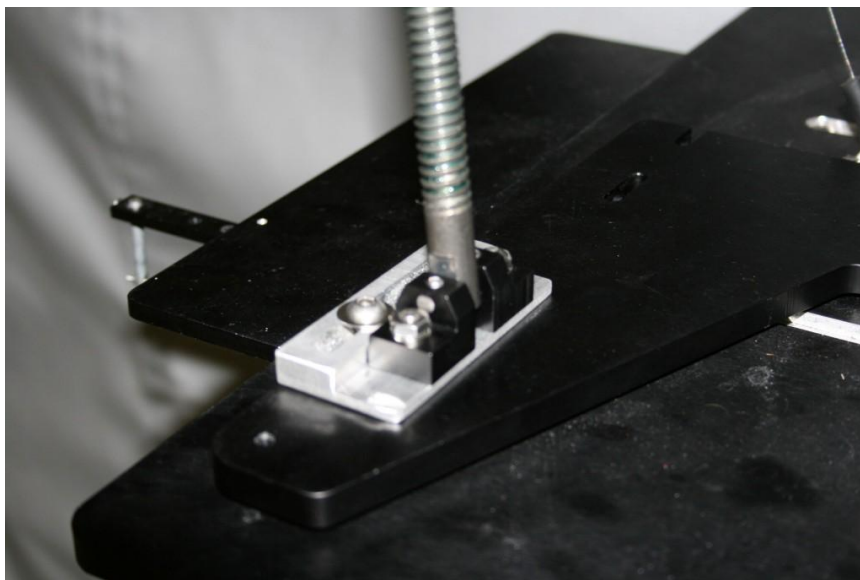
Close-up view of screw jack and screw jack framework assembly
